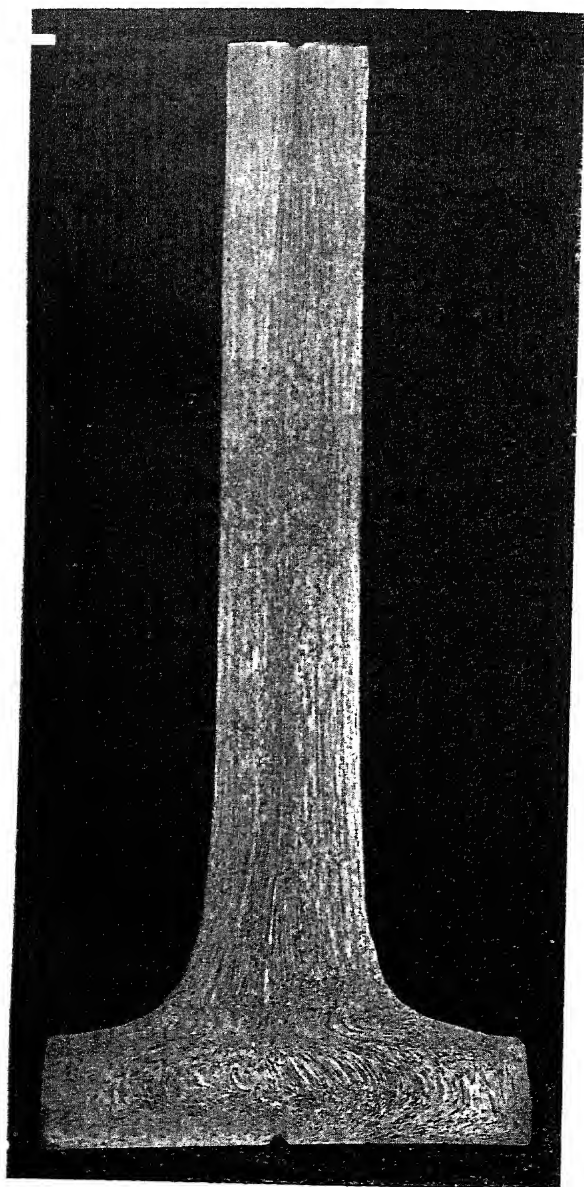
MACRO-SECTION OF VALVE STAMPING
